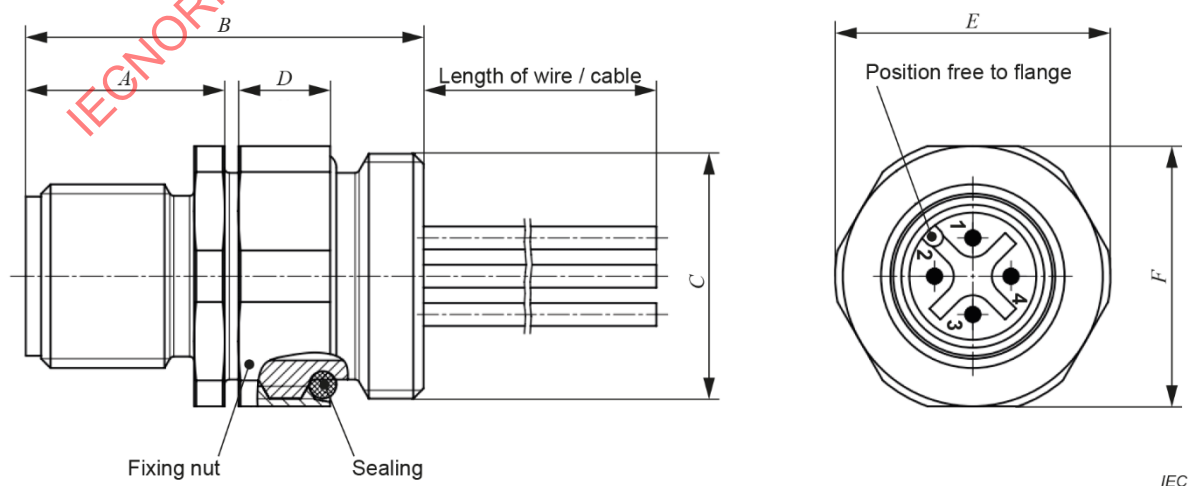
Fixed connector, male contacts, with wire / cable, single hole mounting thread M16 × 1,5, mounting orientation
